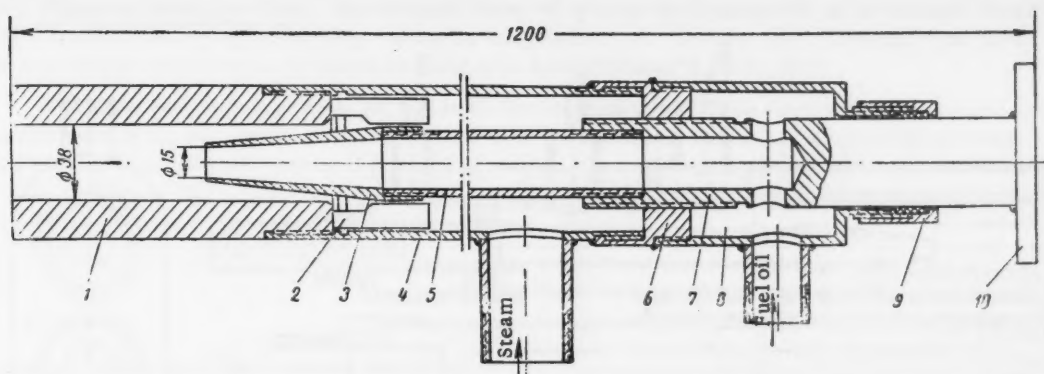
Fuel oil burner (firing capacity: 3350 kg/hr) for mounting at the head of the port: 1) steam nozzle; 2) guide; 3) fuel nozzle; 4) burner body; 5) fuel tube; 6) fixed screw; 7) adjustable screw; 8) oil chamber; 9) holding screw; 10) holder.
